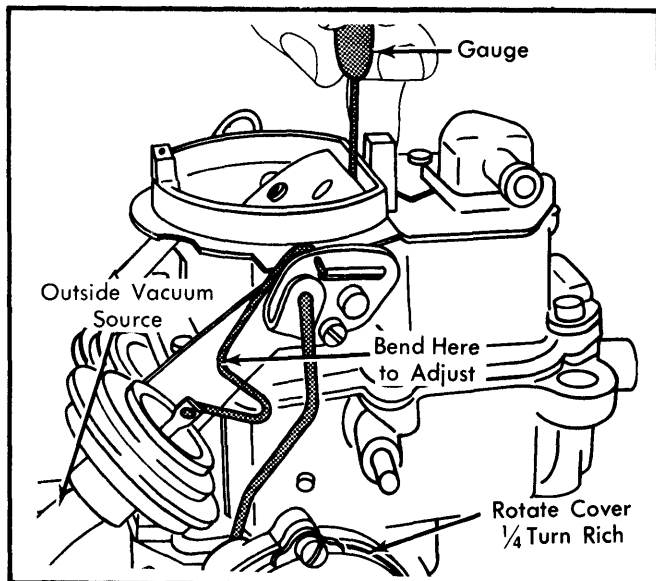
Adjusting Choke Diaphragm (Initial Choke Valve Clearance)
